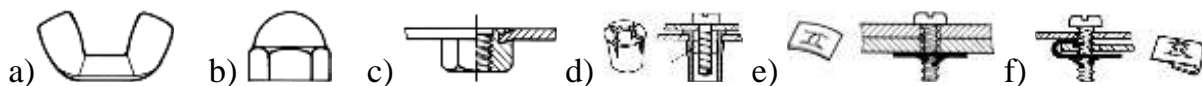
Types of nut (a) wing (b) dome or acorn (c) rivet bush or nut (d) blind (e) flat spring steel fastener and (f) J type fastener
